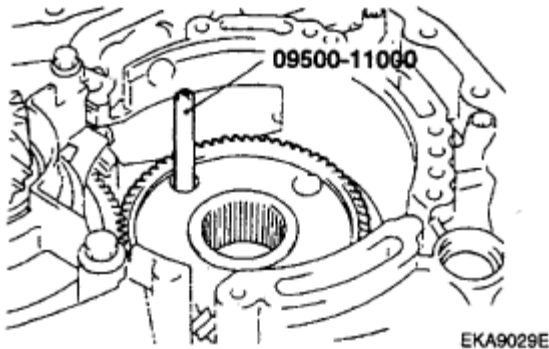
Aligning Teeth Of Clutch Plate, Clutch Disc And Clutch Reaction Plate With Hole Of Underdrive Clutch
